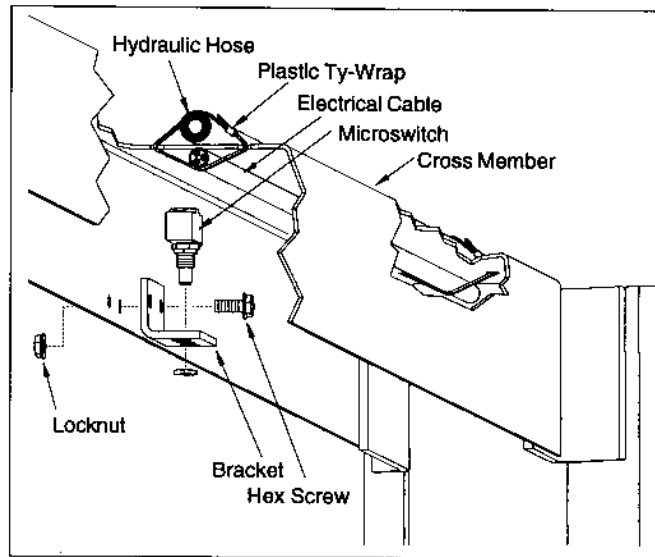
Microswitch Mounting and Hose/Cable Routing
